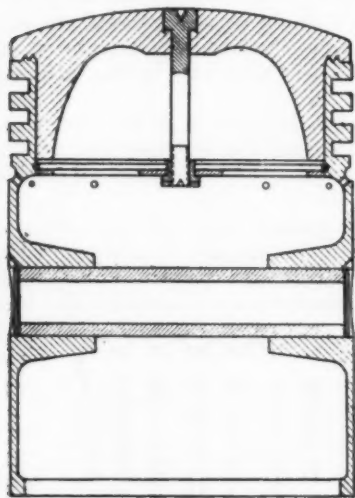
THE L G TWO-METAL AUTOMOBILE ENGINE PISTON
